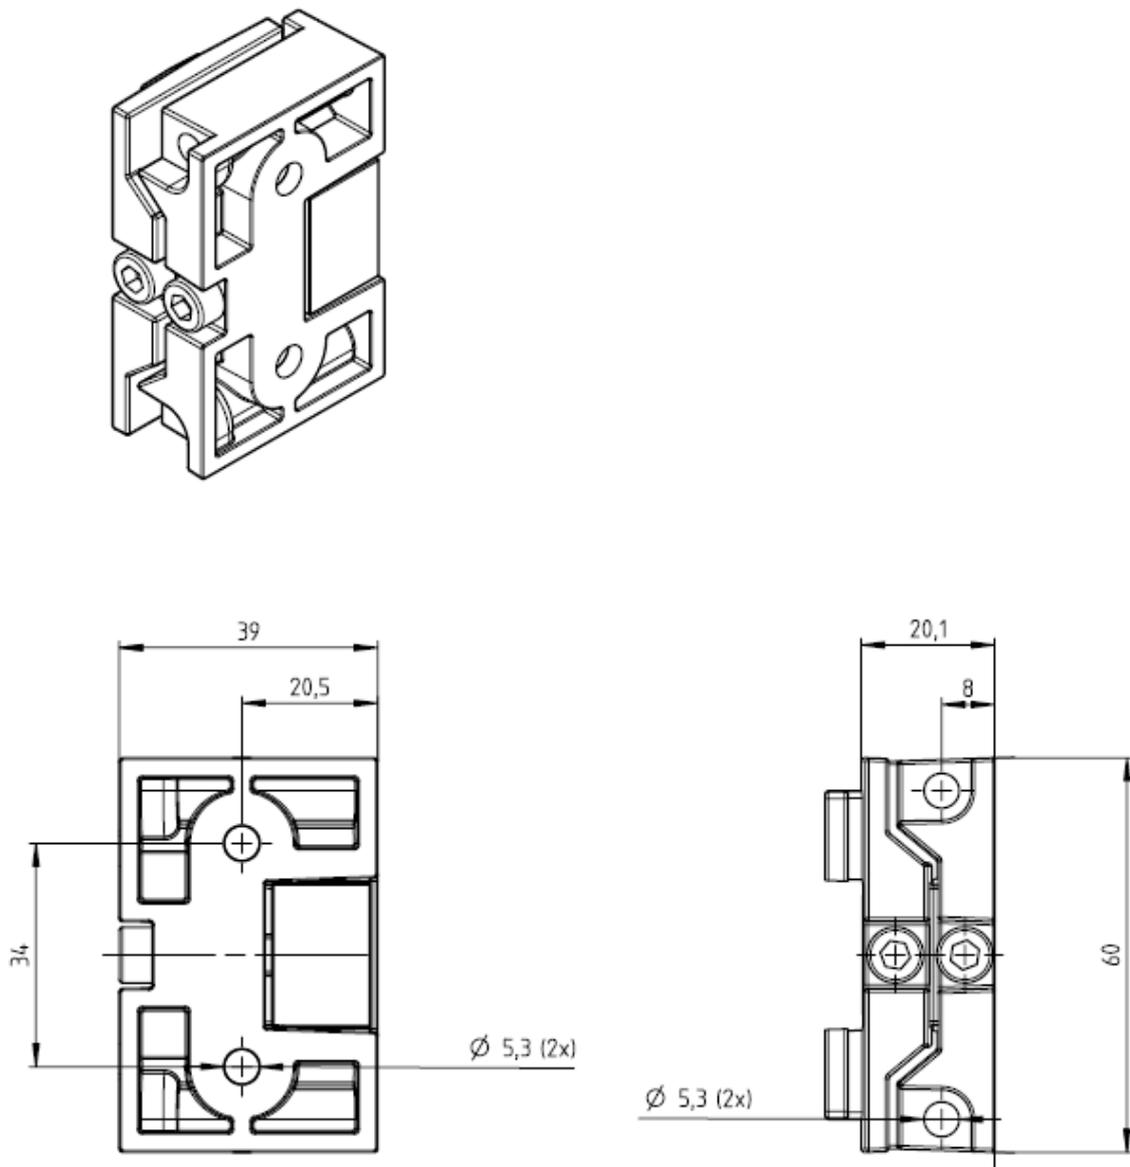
Swiveling mounting bracket for groove mounting BT-SB05
